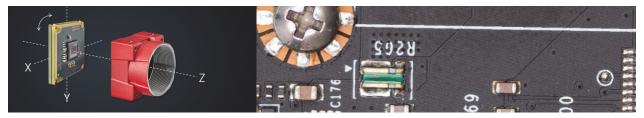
The sensor is twisted to the edge of the PCB (printed circuit board)
